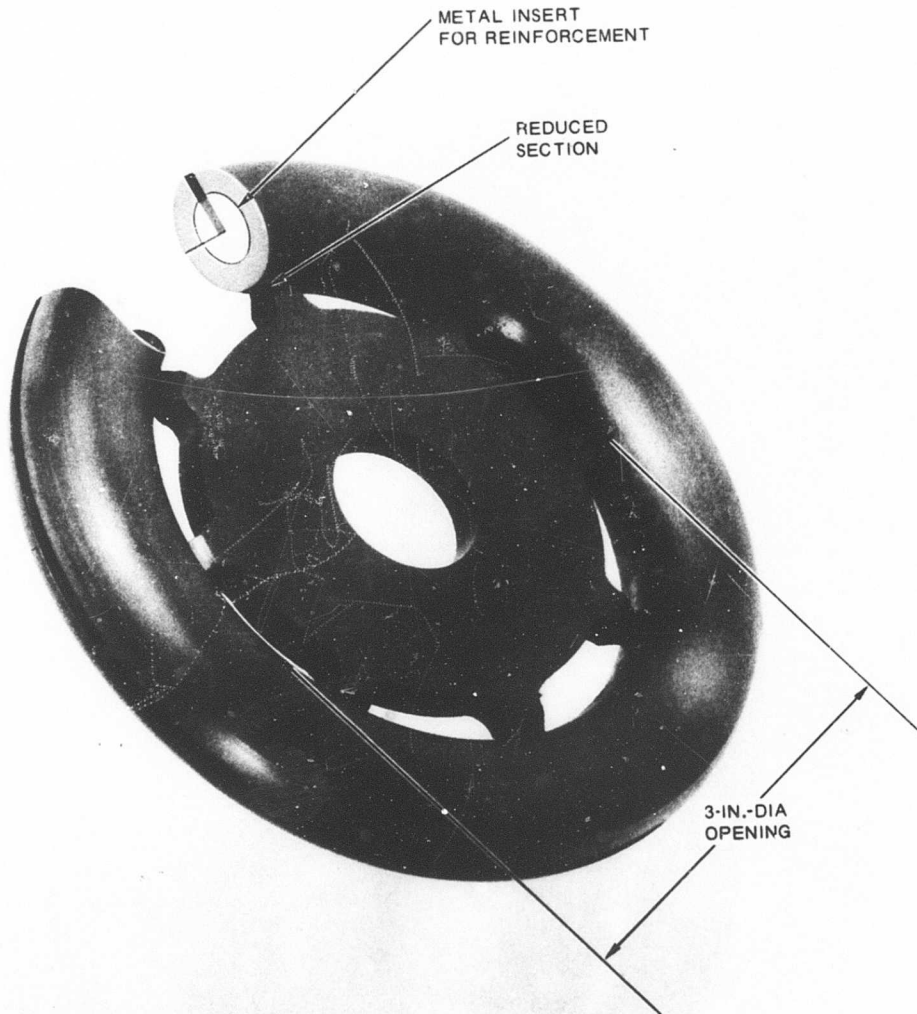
Cross Section of Frangible Protective Bulkhead Adapter
